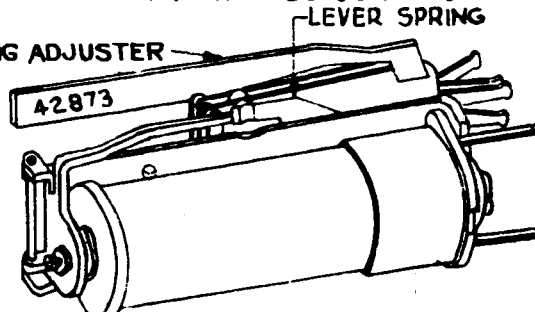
ADJUSTING LEVER SPRINGS FOR TENSION
